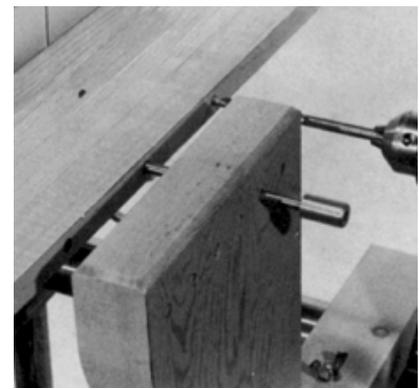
If you use a hole-spacing guide, you can do accurate work without needing layout. After you bore each hole, engage the pin. This positions the workpiece for the next hole. Spacing is determined by placing the guide pin in the appropriate hole in the guide.
